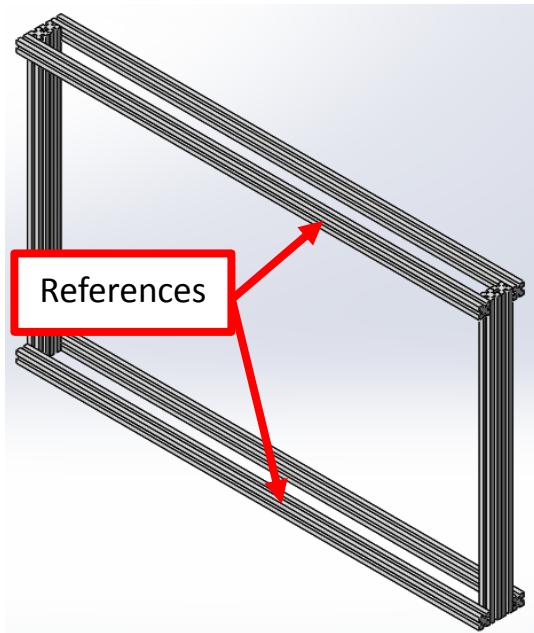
Main frame of the new welding jig design with the front lower and front upper profiles used as references
